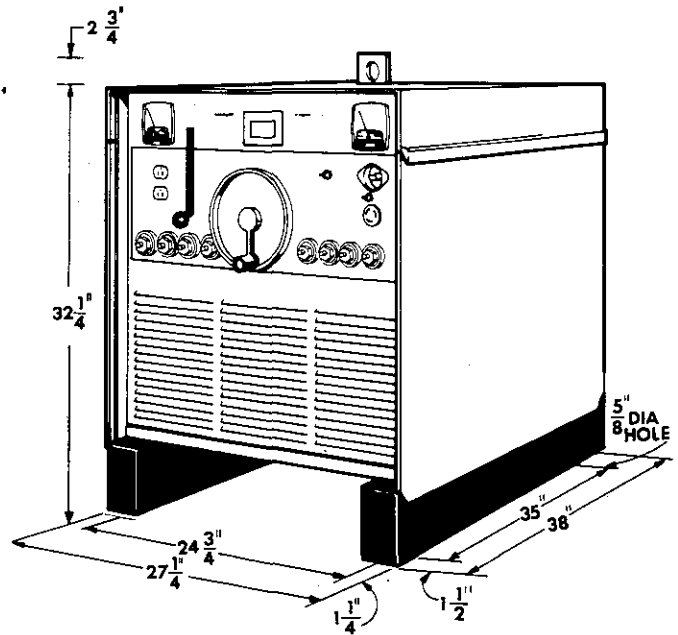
Dimensional Drawing and Base Mounting Hole Layout
